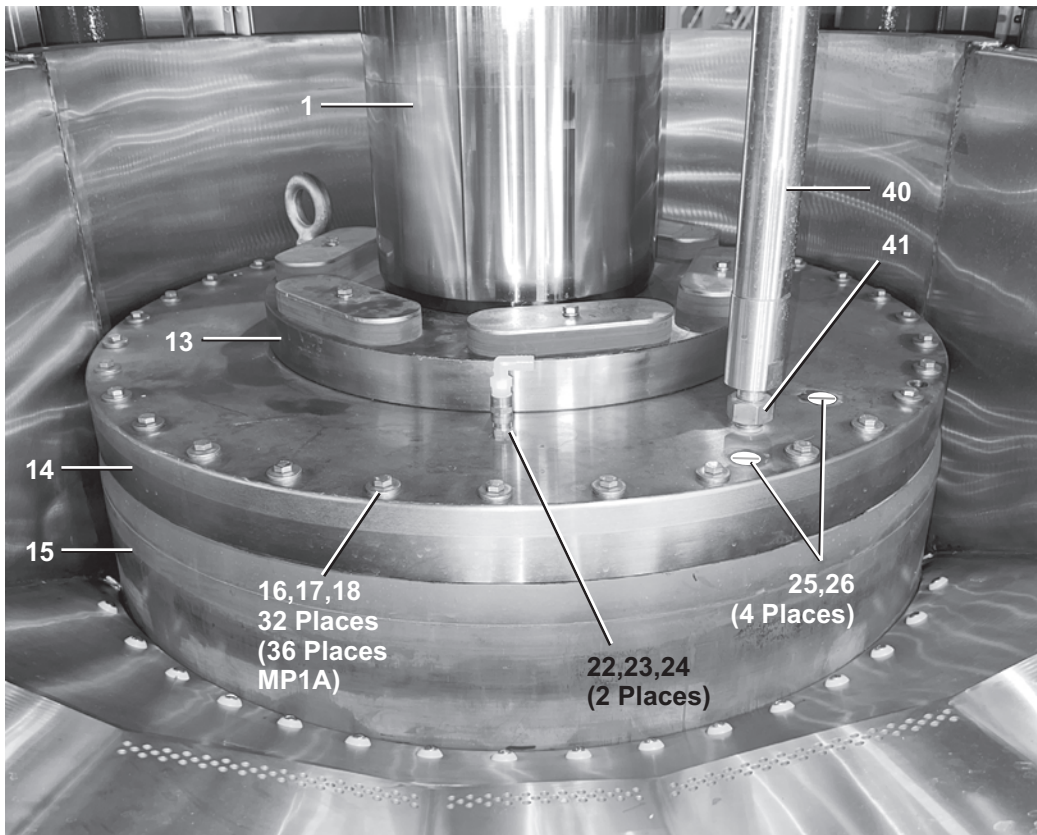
Hydraulic Ram to Upper Press Weldment (See Detail A.)
